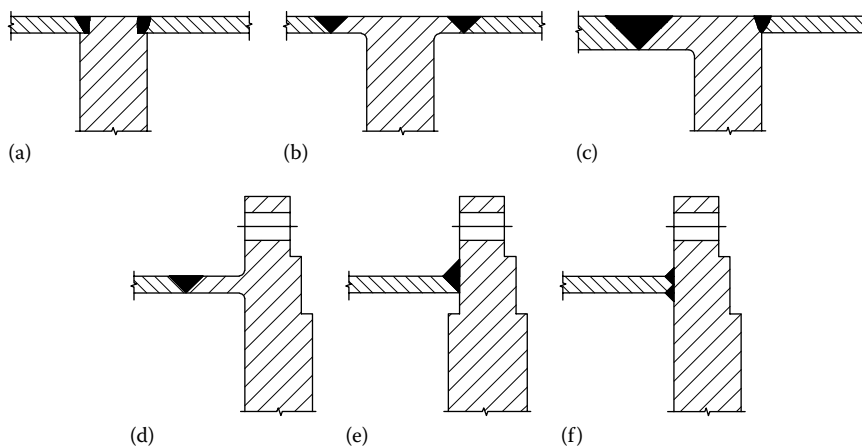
Configurations of tubesheet to shell welding—(a–c) both shell and channel welded to tubesheet, (d) tubesheet with a stub is welded to shell and (e–f) tubesheet is welded to shell and channel side in bolted design.
